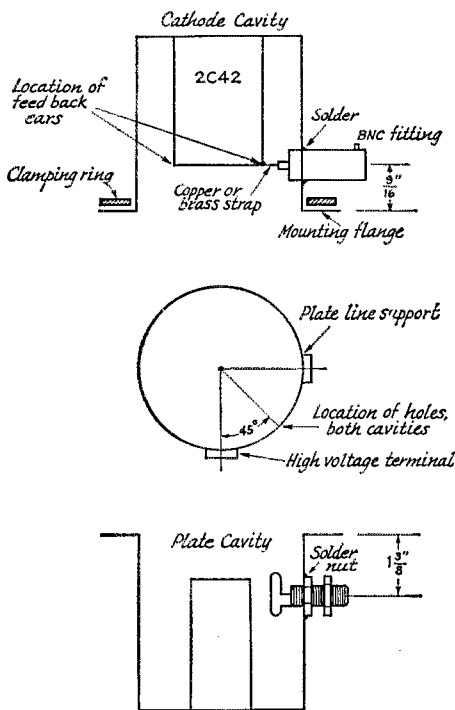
Details of the cavity modifications in the APX-6 transmitter. At the top is a cut-away view of the cathode cavity, showing the method of coupling. When the cavity is taken apart the feedback "ears" or lobes will be seen as parts of the inner conductor, at the points indicated. They should be broken off flush with the end of the line.
